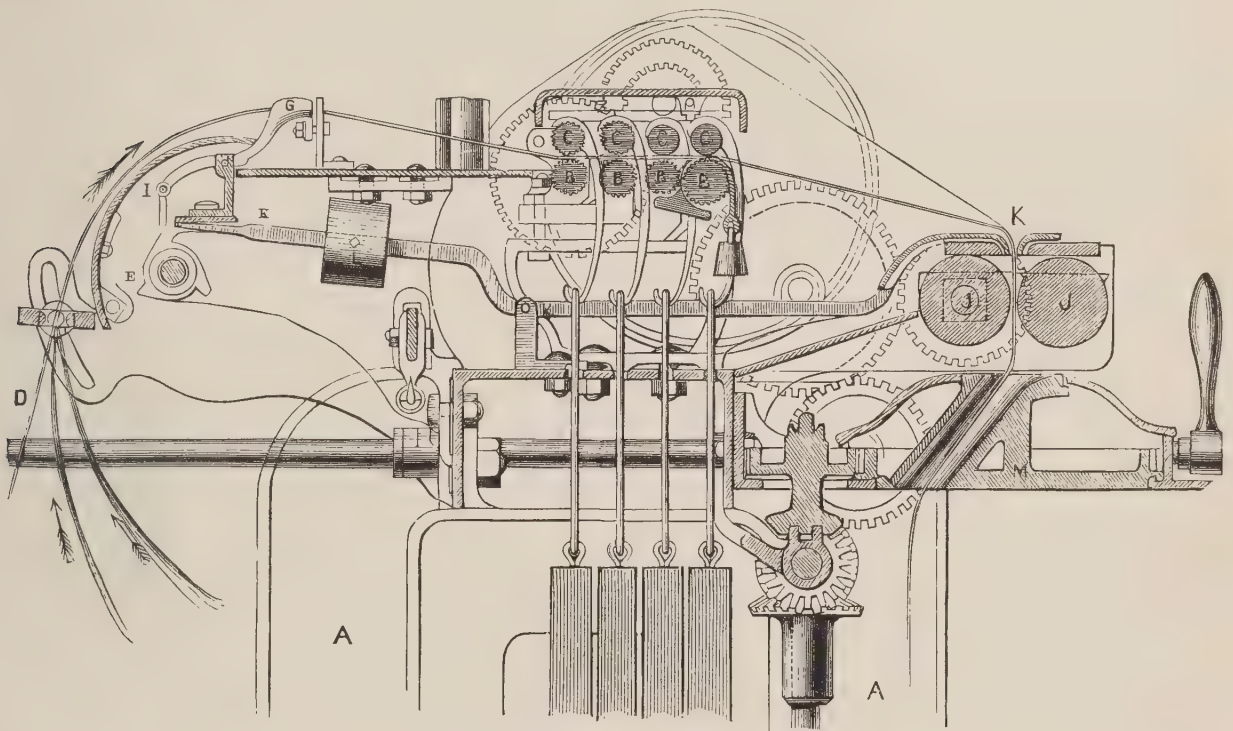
SECTIONAL VIEW OF DRAWING FRAME.
